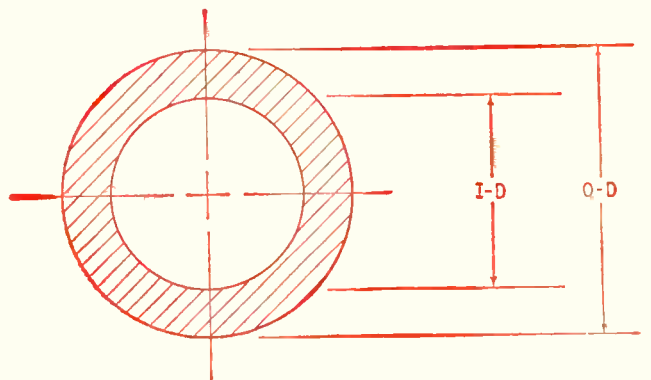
Key to dimensions given in Table II. Cross sectional view of circular waveguide
